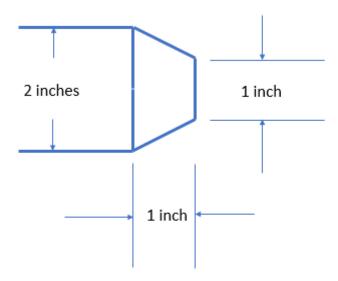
Illustration of Debris Penetrator Test Dowel Tip Taper
